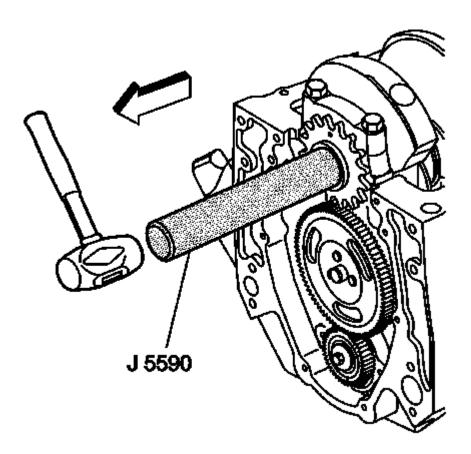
Installing The Crankshaft Sprocket Using J 5590 Courtesy of GENERAL MOTORS CORP.
